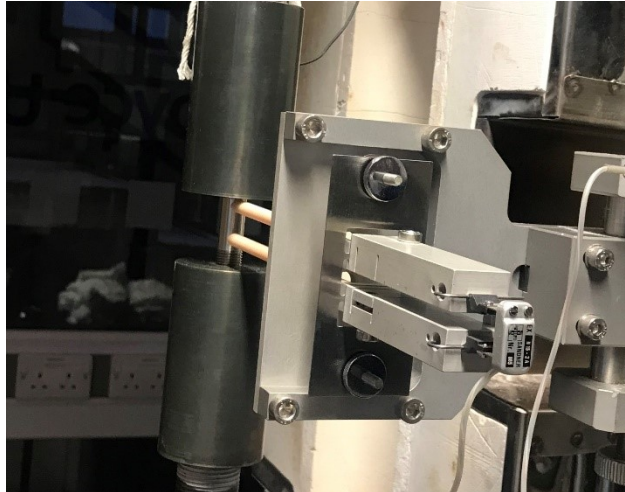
Axial tensile-fatigue testing setup and the special fixture used for fitting the IN718 large bolts
